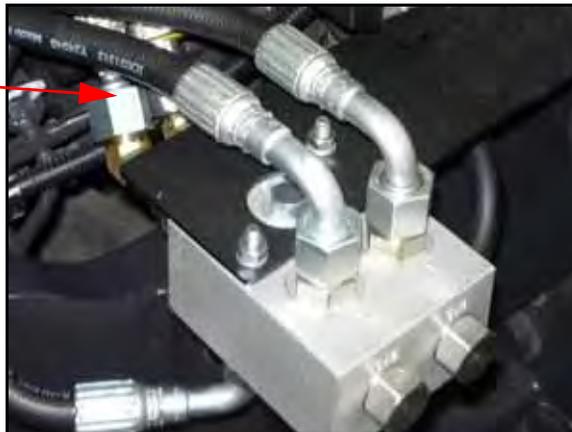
Hydraulic Hose Installed on SmarTrax Valve
